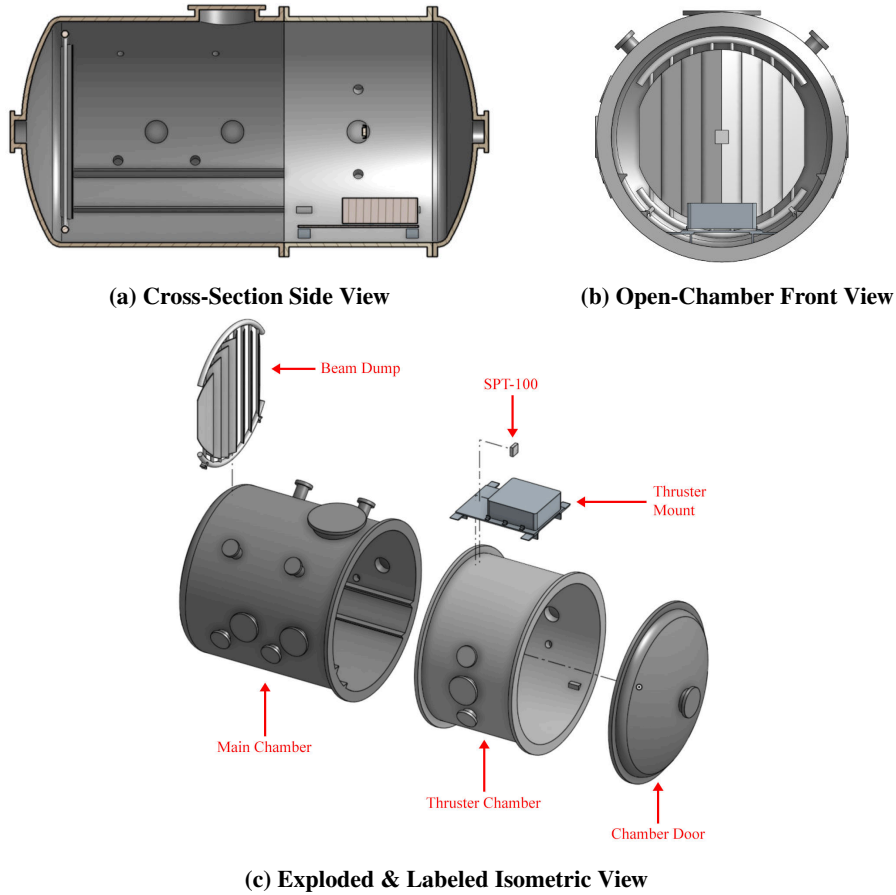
STELLA CAD Model with Beam Dump in EP-Testing Configuration
